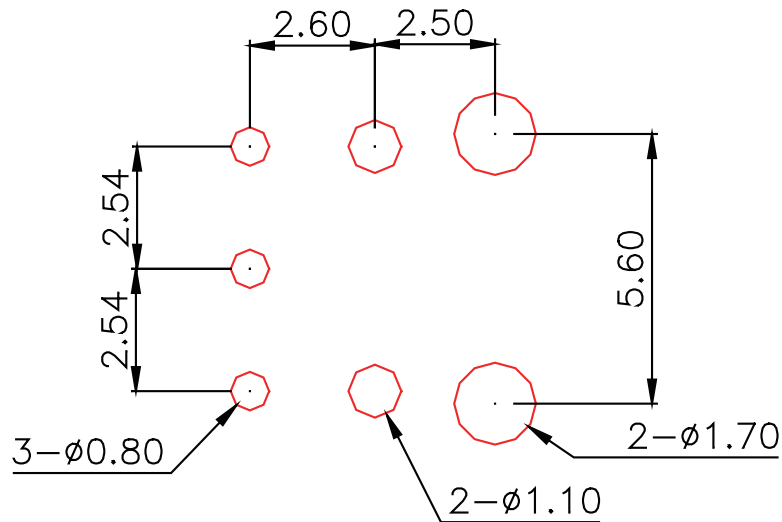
DLR1160-2-N PCB layout for electrical circuit
